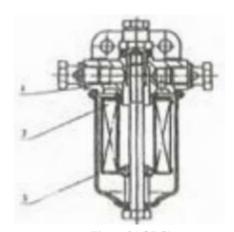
Oil filter1 filter seat, 2 filter element, 3 housing
